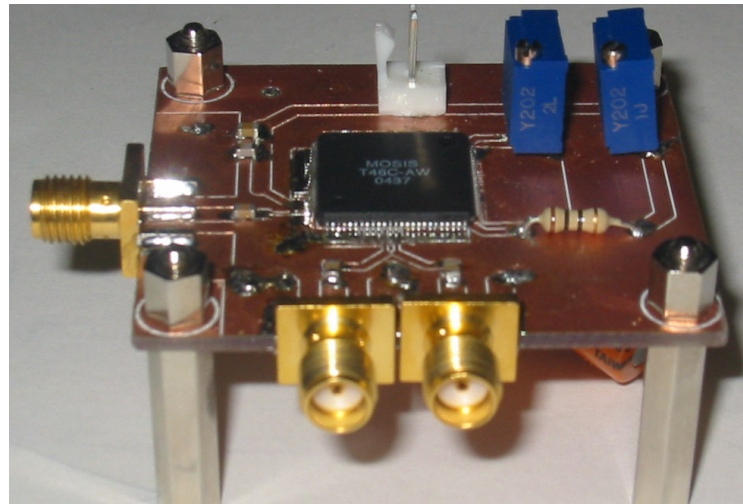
Photograph of Printed Circuit Board for Testing.
